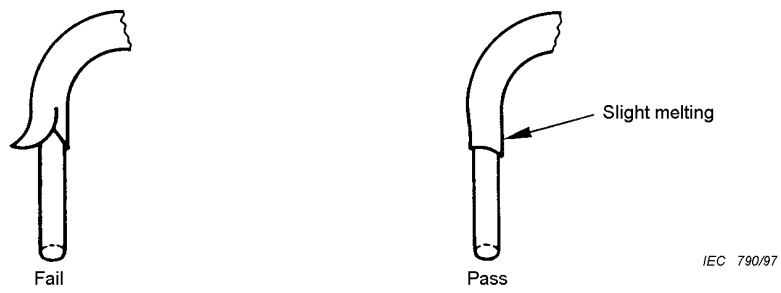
Examples of sleeving after being subjected to test for resistance to soldering heat
